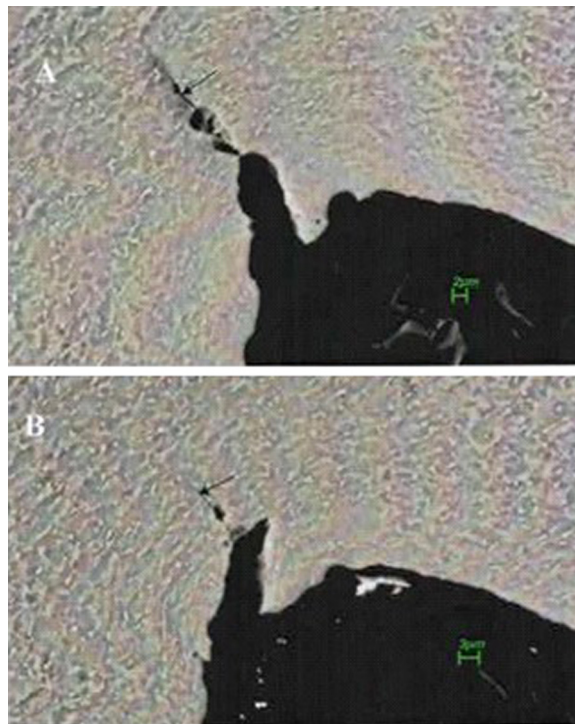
SEM analysis, broken connecting bar longitudinal section [26].
